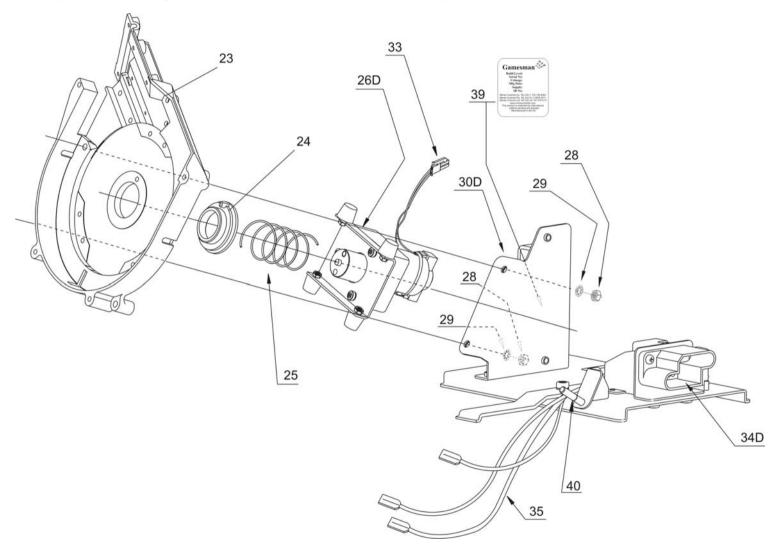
Exploded Drawing – AC Motor, frame and base assembly
